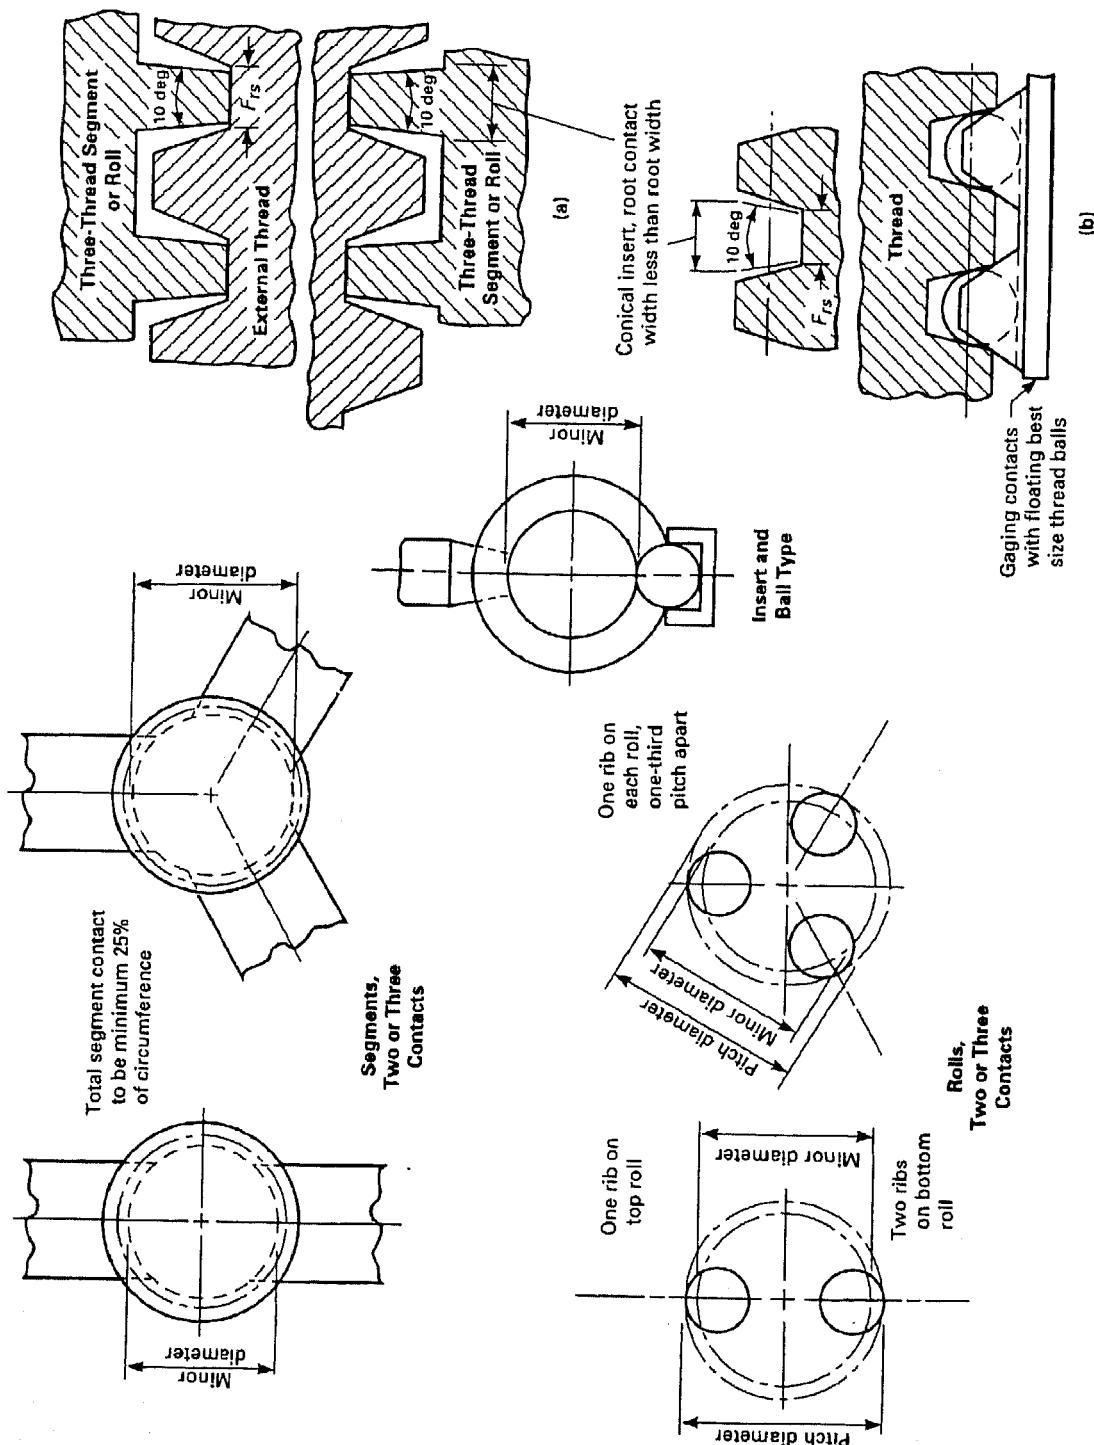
INDICATING DIAMETER GAGES — MAXIMUM/MINIMUM MINOR DIAMETER LIMIT AND SIZE FOR EXTERNAL THREAD
